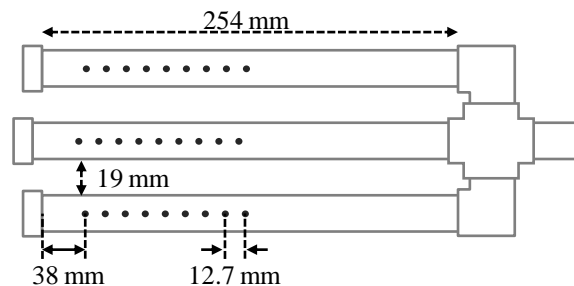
Schematic of proxy cookstove burner (PCB). The parallel burner pipes are 21 mm diameter stainless steel with 3.76 mm diameter holes and are mounted to a cross and elbows. Fuel enters the burner from the right of the image and is controlled by a mass flow controller.
